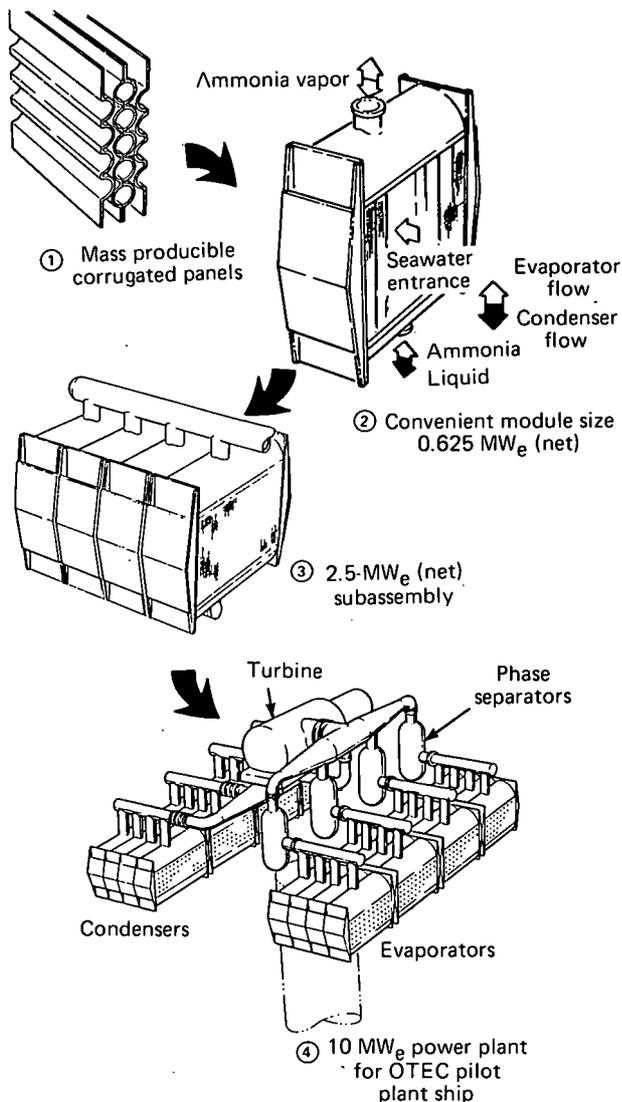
Assembly and general arrangement concepts for OTEC power system employing the TRW/Linde concept for plate-type heat exchangers.
